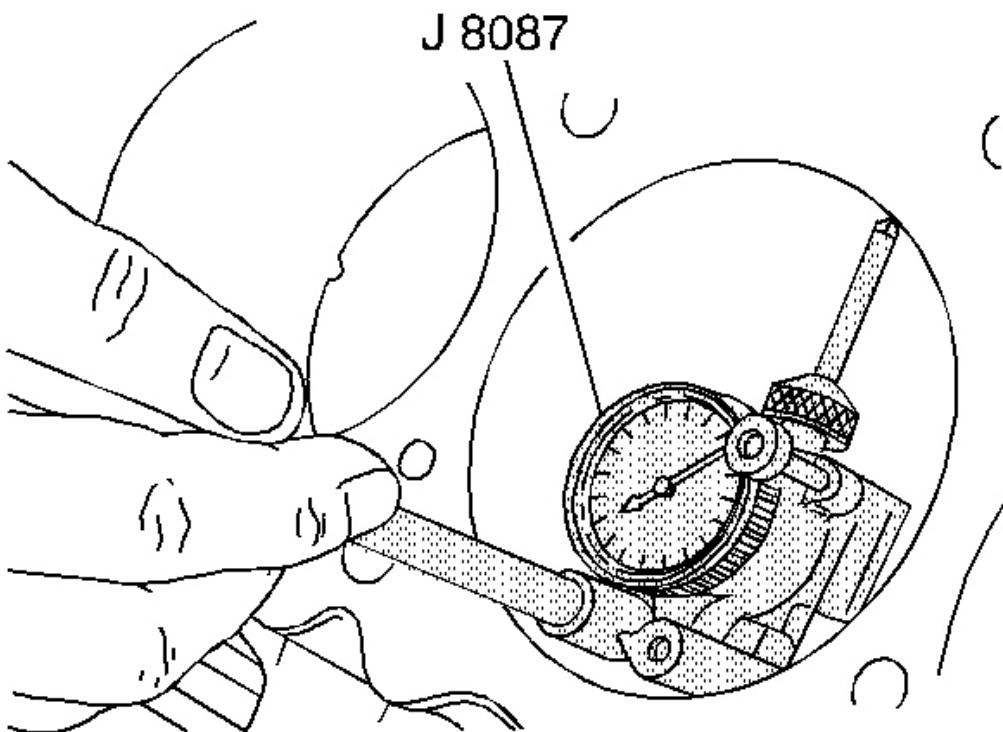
Inspecting Crankshaft Main Bearing Bores
